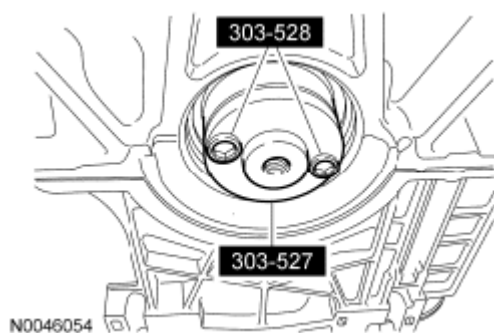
Identifying Crankshaft Rear Oil Seal Screws
